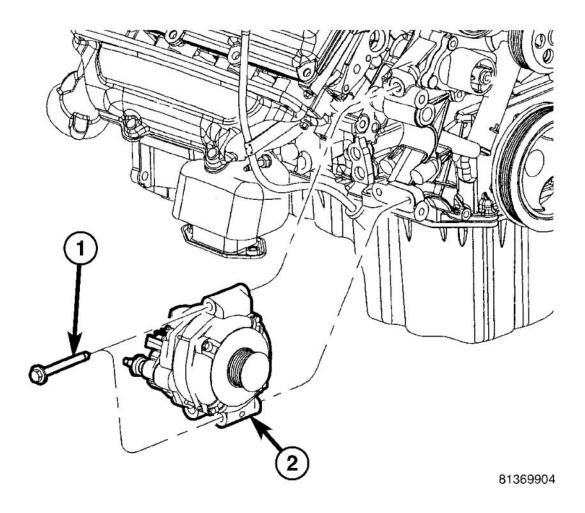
Generator Mounting - 5.7L Courtesy of CHRYSLER LLC
